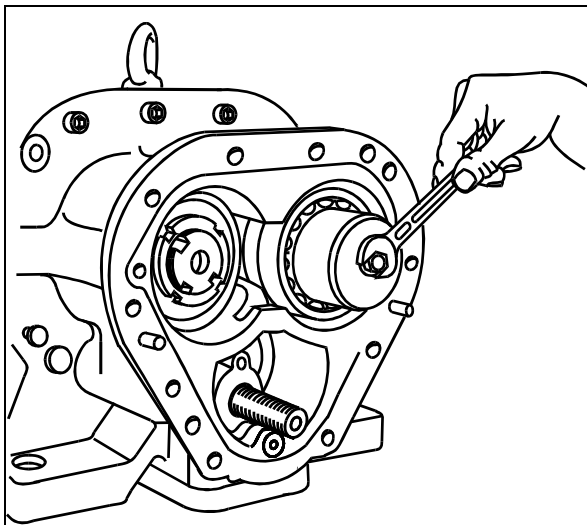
Assembly of the axial bearings (13) using mounting device T13
